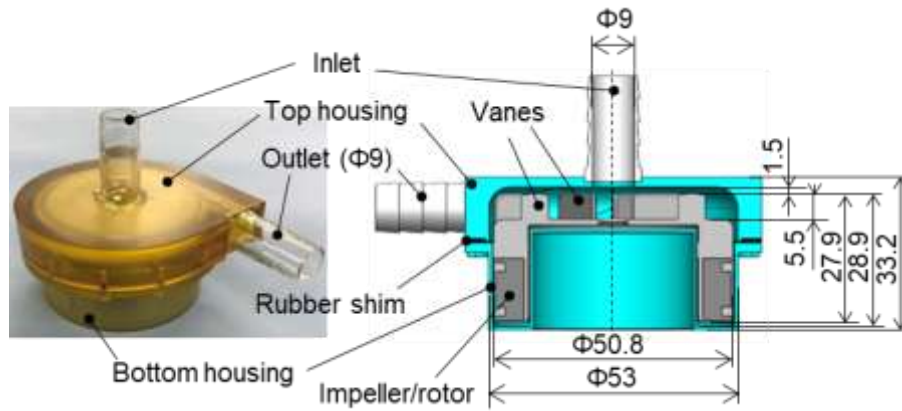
Disposable pump head: (a) Photograph; (b) Cross-section view.
